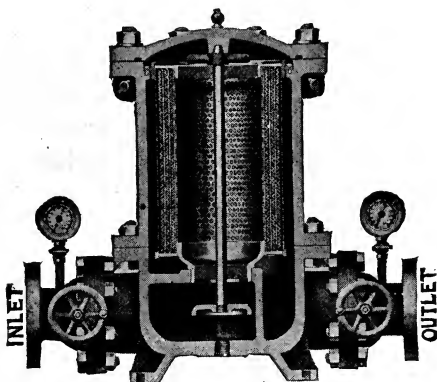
,863.—Lagonda *pressure filter* oil separator; sectional view showing perforated spool case layers of terry linen and spacer, valve for closing up filter spool when raised and lifting handle. In operation, the feed water enters the inlet side of the filter and passes up through the bottom of the filtering spool, through the perforated core and layers of terry linen, traveling to the outlet from all points of the spool, all the water passing through each layer of the cloth. In design, the total effective filtering area of the cloth is over 200 times the area of the inlet, giving positive or pressure filtration without undue pressure drop. In construction, there are two chambers so that one may be cleaned while the other is working thus permitting continuous operation.
